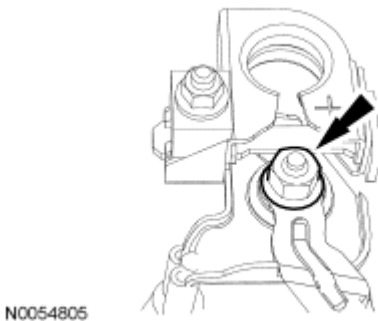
Locating Power Feed To Battery Terminal And Nut
